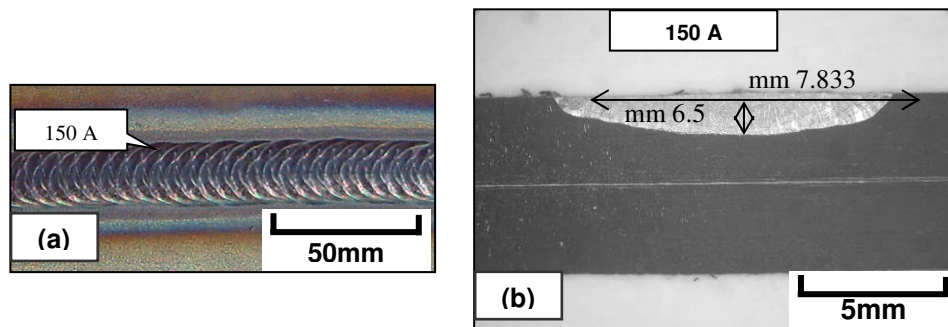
Photograph of face side (a) and macrograph of a cross section (b) of GTA bead-on-plate autogeneous weld made using 150A welding current, 15V welding voltage, 140mm/min welding speed, 15 l/min argon shielding flow rate, 0.05% oxygen content in back purging.
